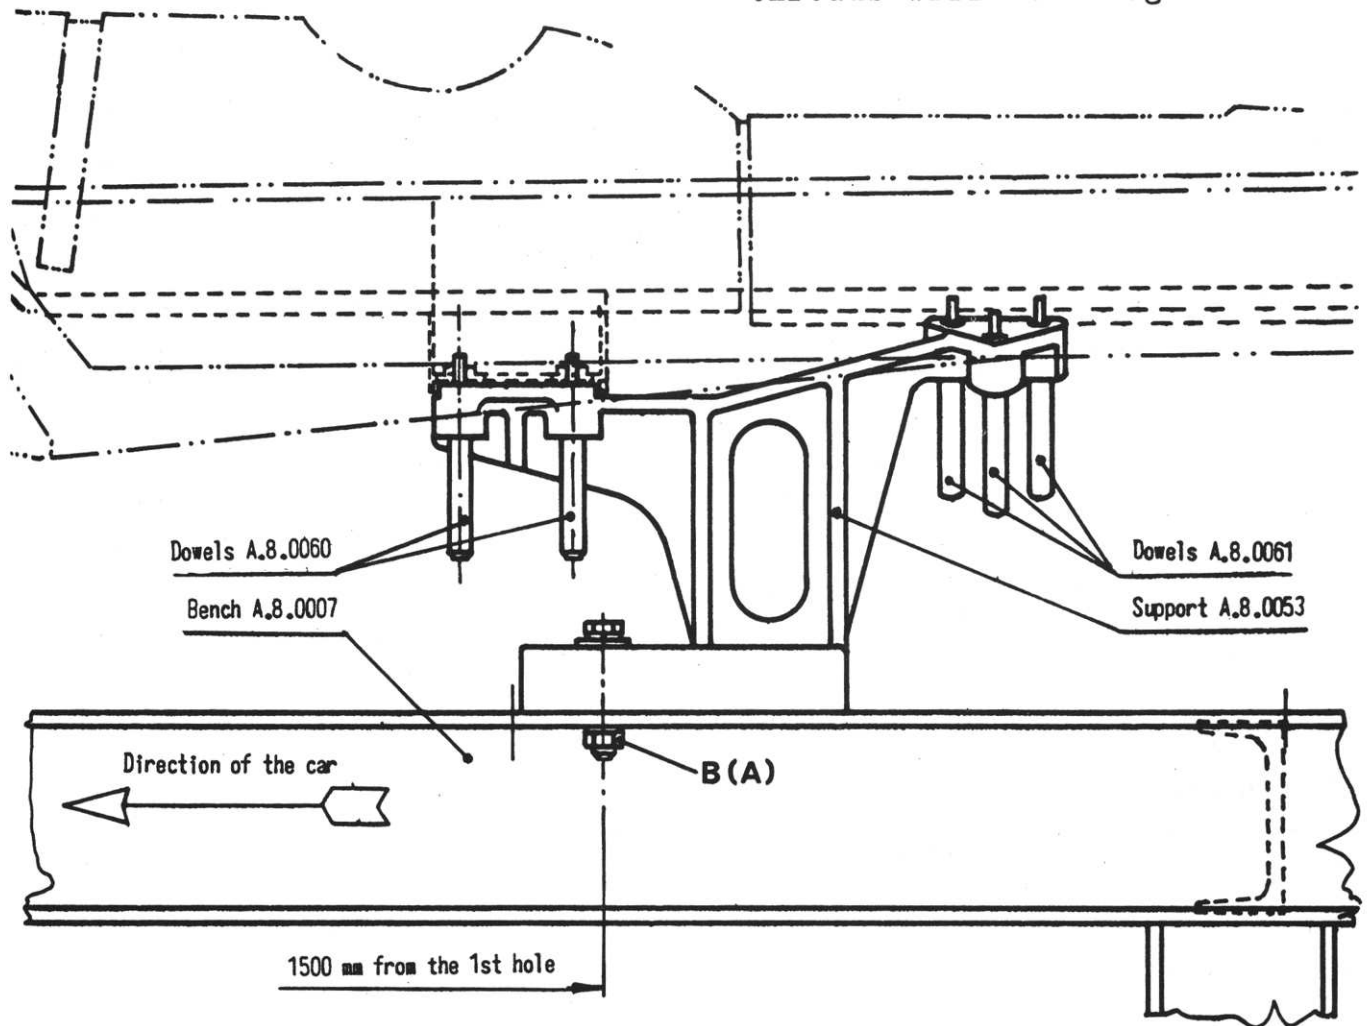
CHECKING ATTACHMENTS OF GEARBOX SUPPORT MEMBER AND INTERCONNECTION OF CENTRAL CROSS-MEMBER
